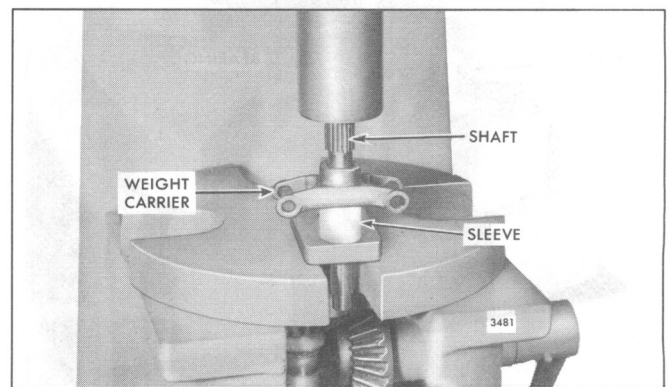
Installing Governor Weight Shaft in Weight Carrier
